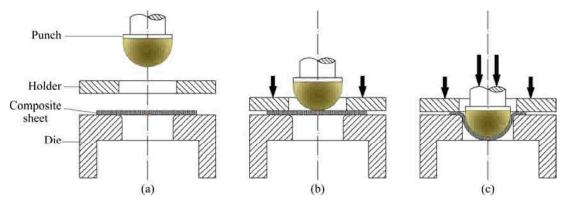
Illustration of thermal stamping process: (a) Heating die set and punch; (b) Heating specimen through heat transfer; (c) Thermal stamping
